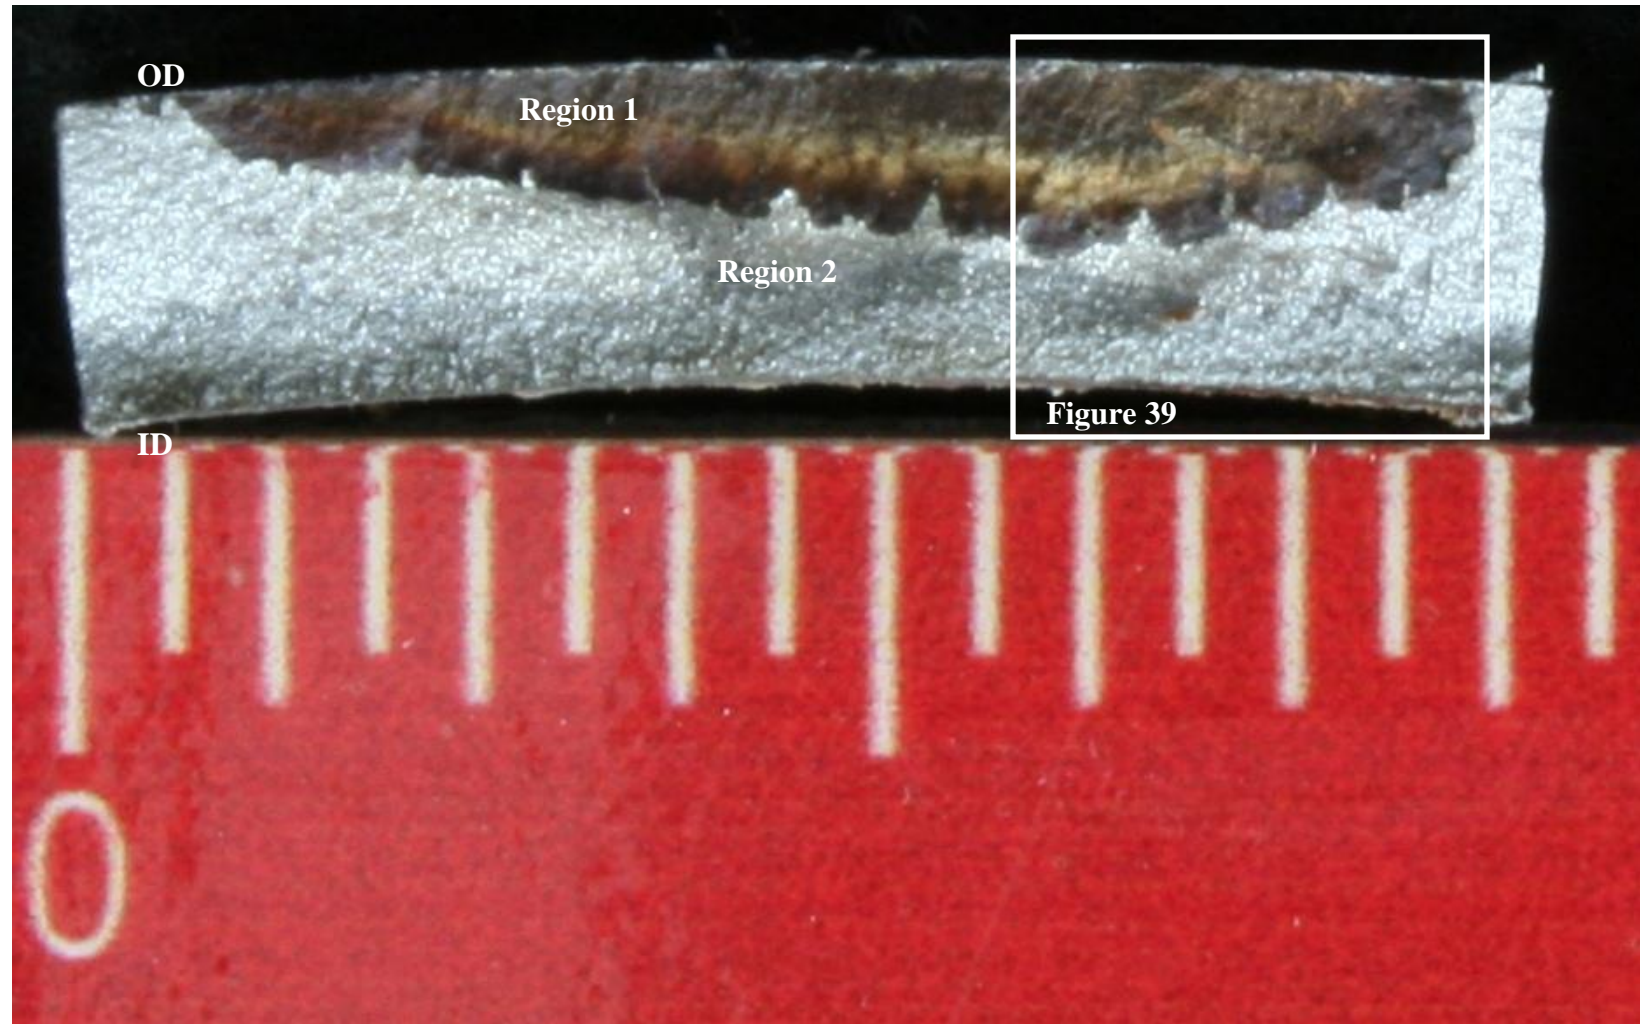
Photograph of the fracture surface removed from Crack Colony 6A.
